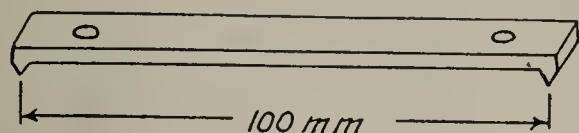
Hundred Millimeter Gage Which Is Used to Notch the Wet Clay Samples With.
